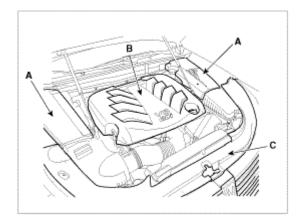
Identifying Engine Room Covers, Engine Cover And Radiator Grill Upper Cover Courtesy of HYUNDAI MOTOR AMERICA
